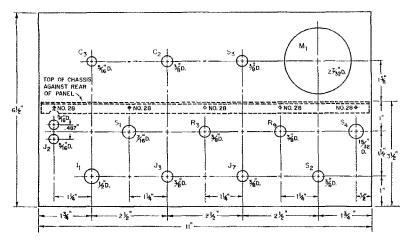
Layout drawing of the panel (front view) for the mobile transmitter.
